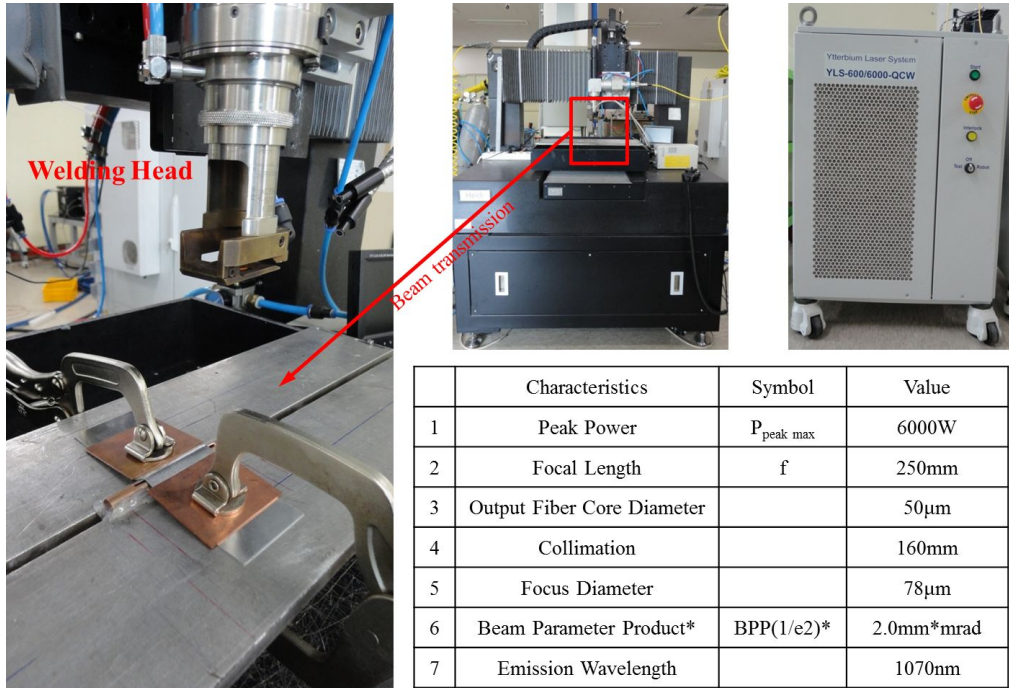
Fiber laser and lap welding experiment equipment
